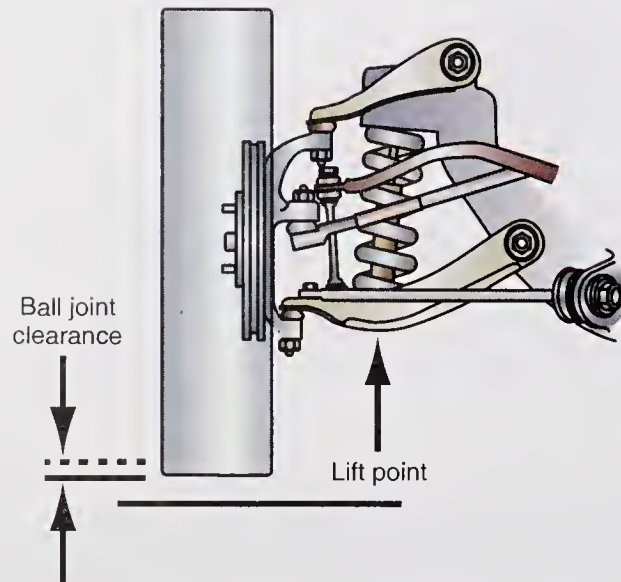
Floor jack position to check ball joint wear with spring between the lower control arm and the chassis.
